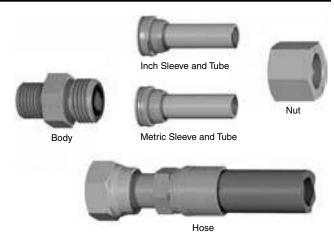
Seal-Lok Works with Inch or Metric Tube and Hose
